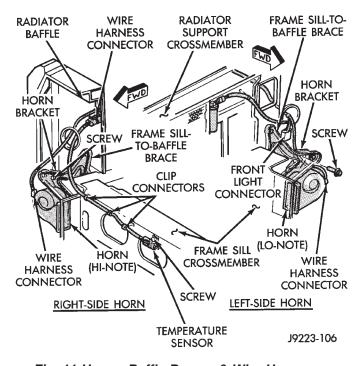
Horns, Baffle Braces & Wire Harnesses
